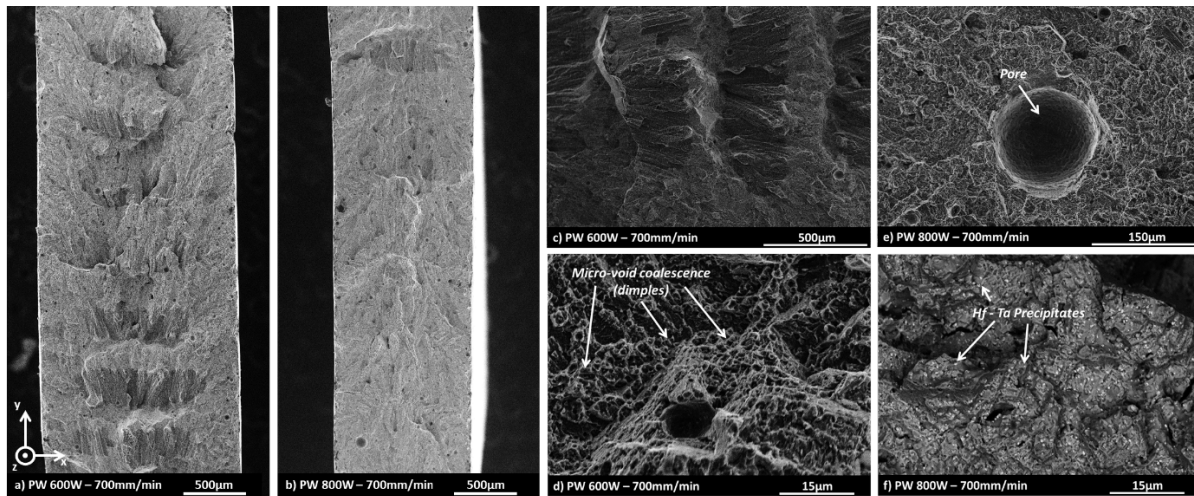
(a) and (b) cross section of the fracture surfaces; (c) and (d) fracture surface details of the sample produced with laser power of 600W; (d) and (e) fracture surface details of the sample produced with laser power of 800W.
